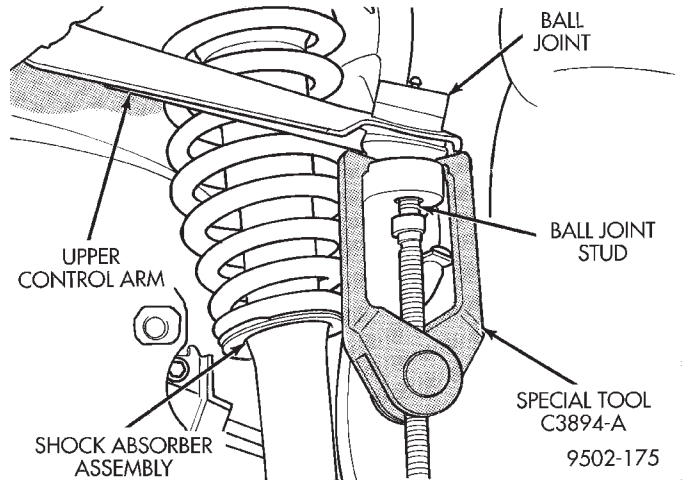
Ball Joint Stud Removal From Steering Knuckle
